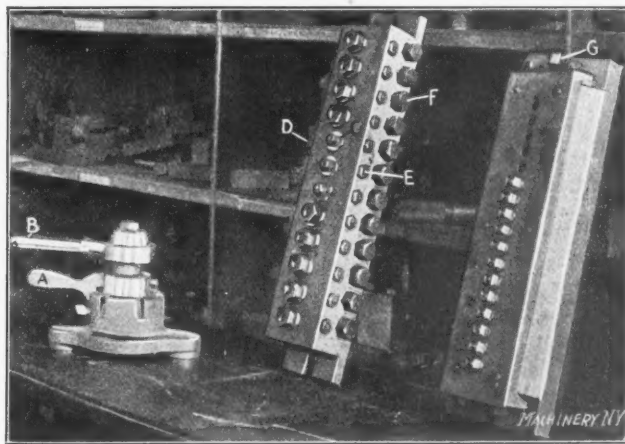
Interesting Types of Fixtures for Holding Shoulder Nuts and Collar Head-screws, while they are being milled
